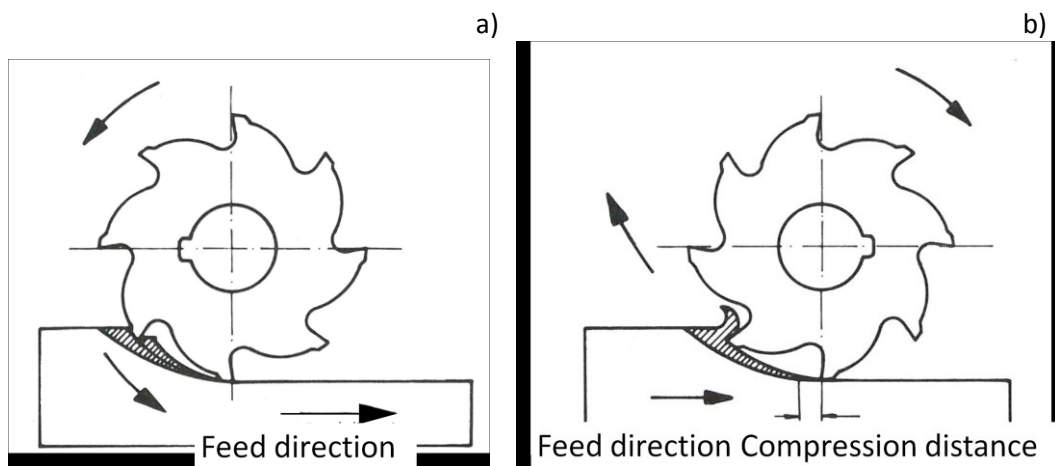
Scheme of the a) climb-cut and b) up-cut milling [23].
